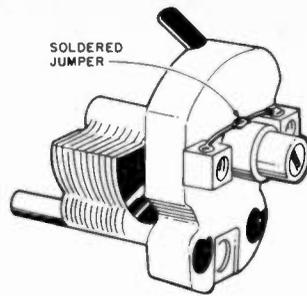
APC type variable capacitor showing shaft housing jumper soldered to mounting studs.
